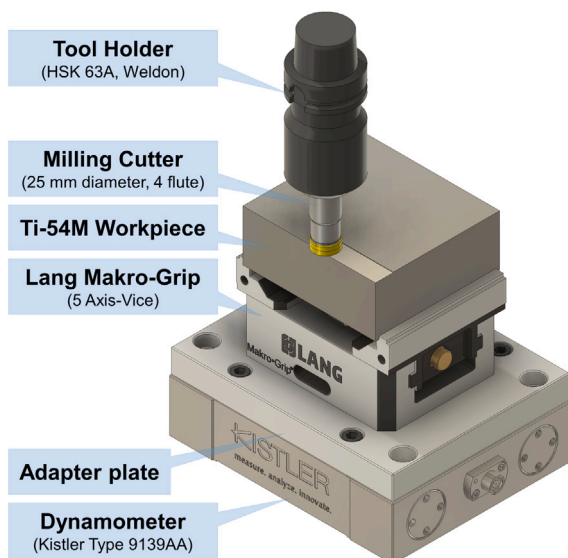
Schematic illustrating the machining and workpiece setup with cutting force data acquisition hardware.
